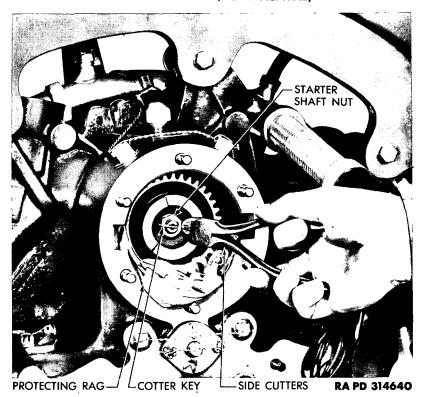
Removing Cotter Pin from Starter Shaft Nut
